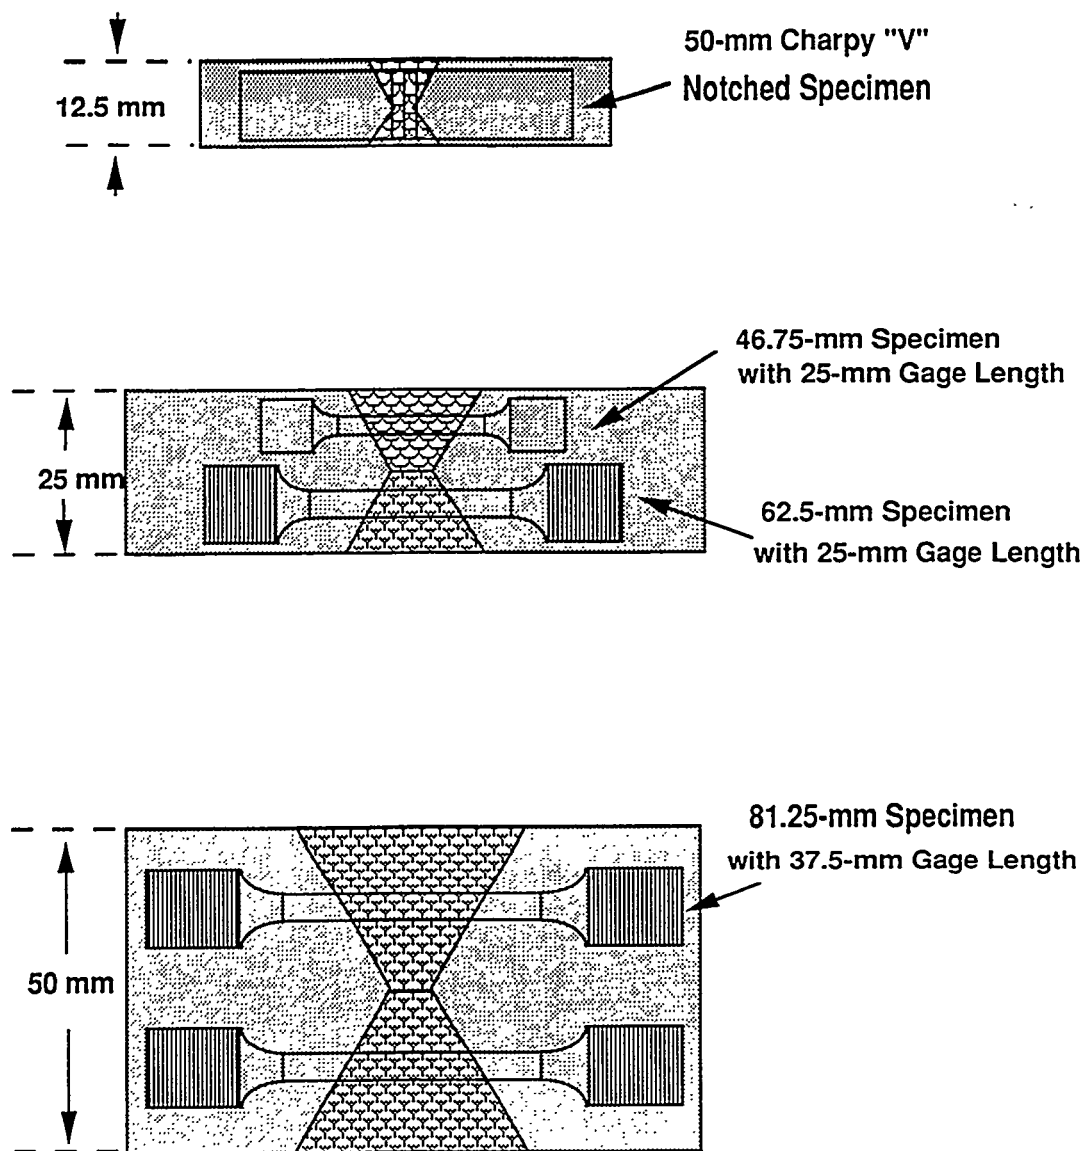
Schematic showing the location and size of mechanical property specimens machined from welded slabs of FAPY alloy.
